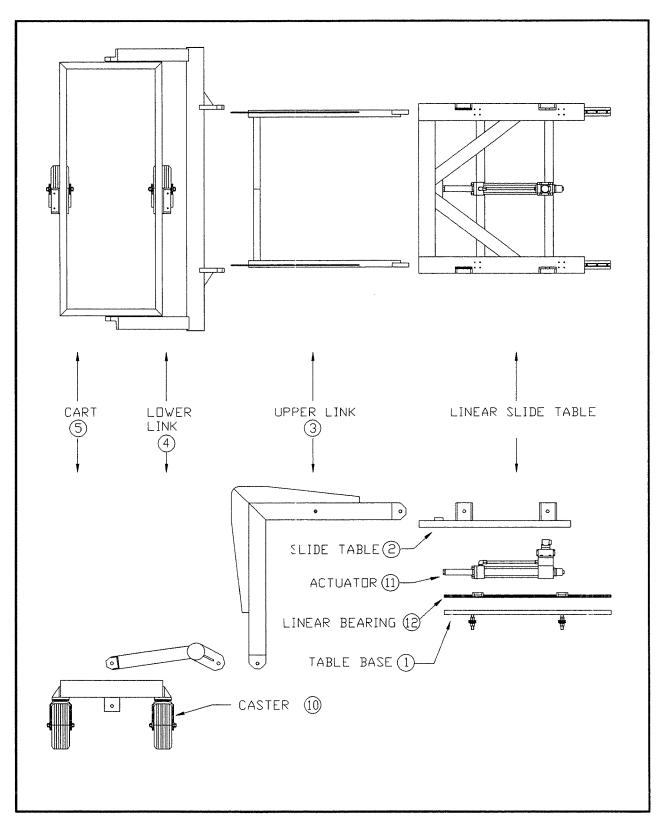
Longitudinal machine basic components. Item numbers correspond to assembly drawing SHRP(LPS)LM-A100 in Appendix D.2.2.
